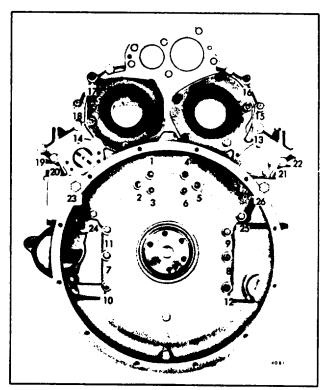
Flywheel Housing Bolt Tightening Sequence (Operation 1)--6V (Engine
